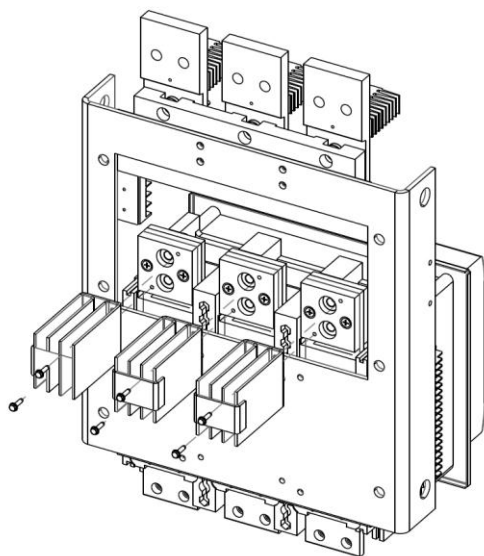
1200A-1600A BOTTOM FEED SWITCH
